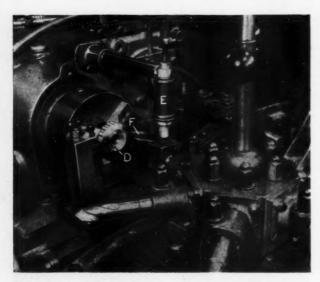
An air-driven unit on the turret is used to drill an offcentre hole, and taper-turning is carried out from the rear by means of a special attachment
